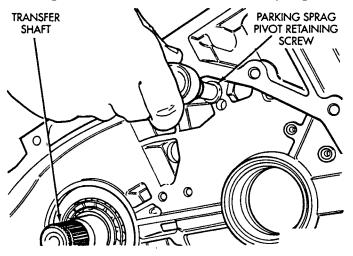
Remove Parking Sprag Pivot Retaining Screw
